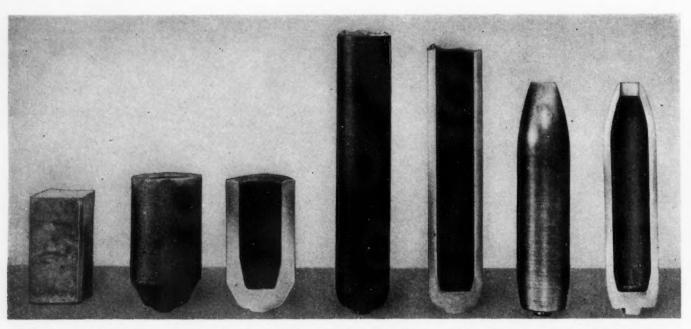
Stages in the manufacture of a shell forging on the Baldwin-Omes machine. A square-section billet is pierced and drawn. Nosing is possible though not generally economical.
